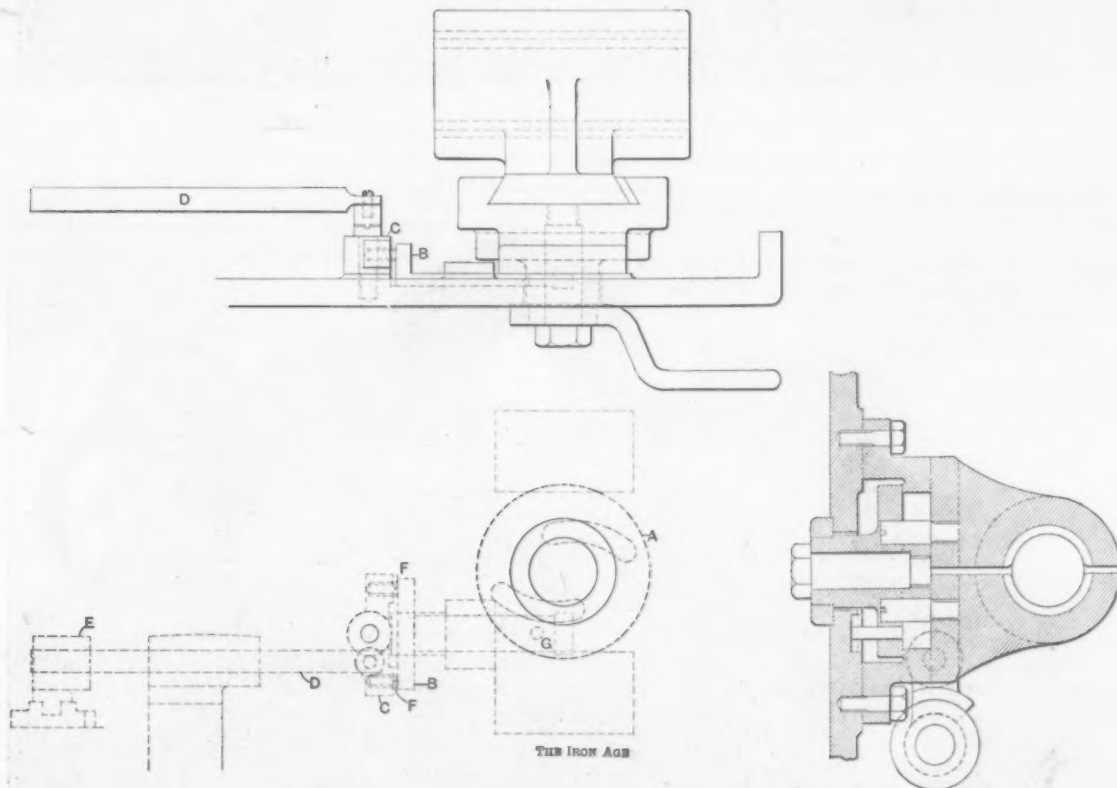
Interlocking Device for Rod and Screw Feeds.
